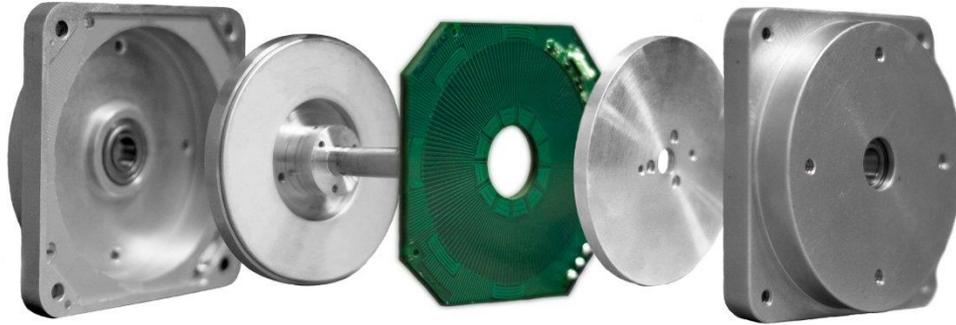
PCB motor stator assembly (source: [Maritime Executive](#))
